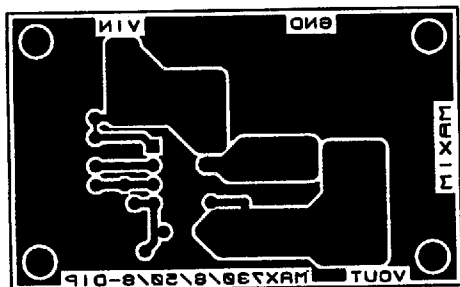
DIP PC Layout, Solder Side (1X Scale)
